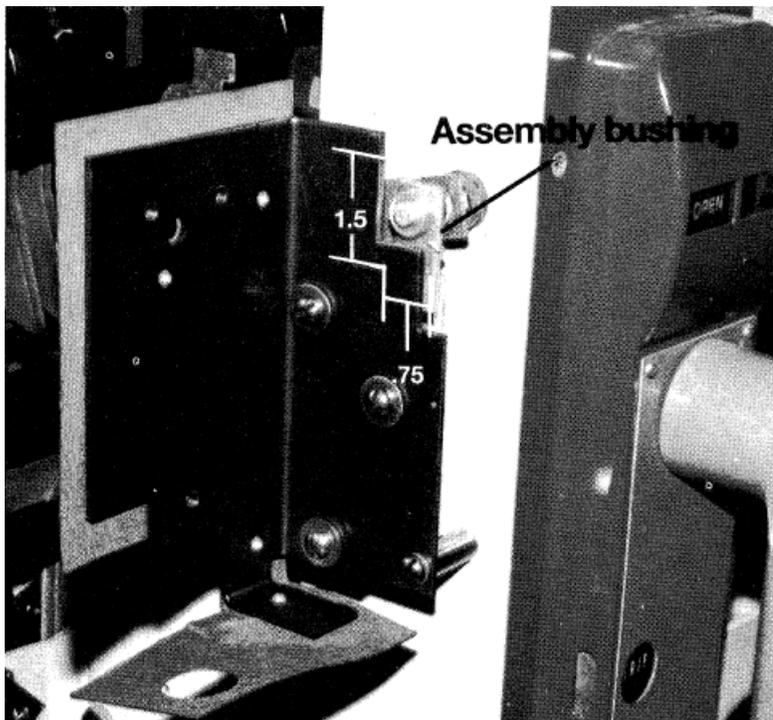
Programmer Mounting Bracket and Plate on a Type AK-50 Breaker
